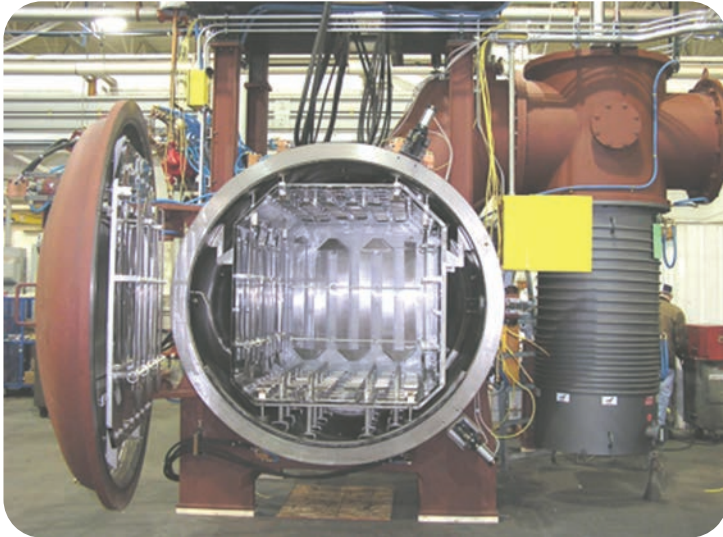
Large diffusion pump on a vacuum aluminum brazing furnace.
